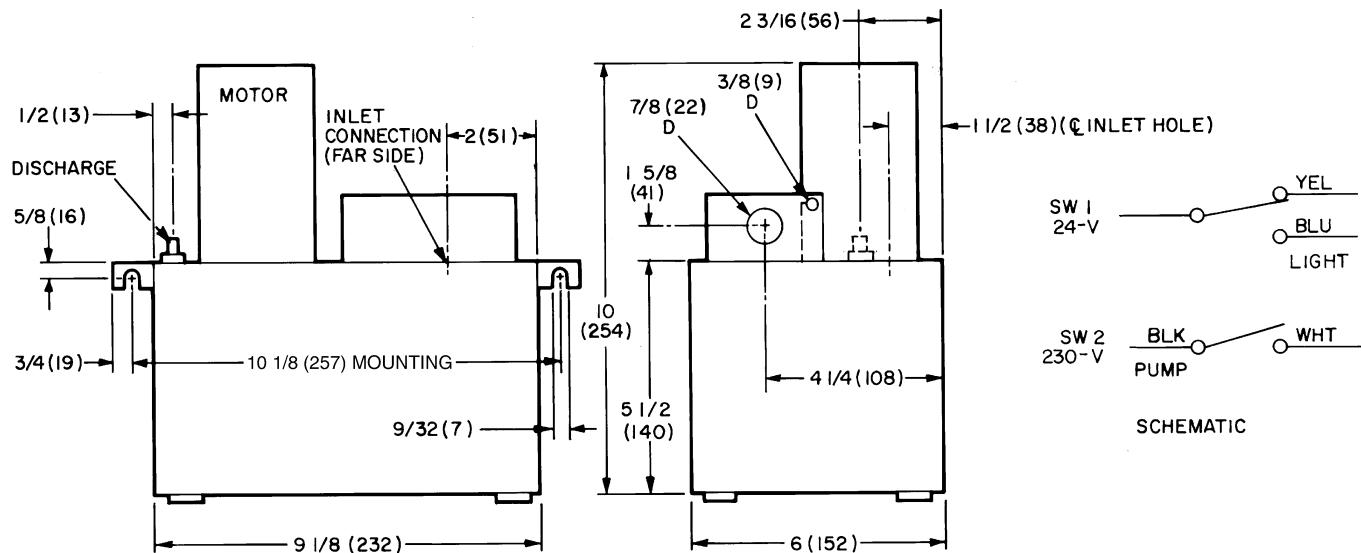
Accessory Condensate Pump Dimensions, in. (mm)
